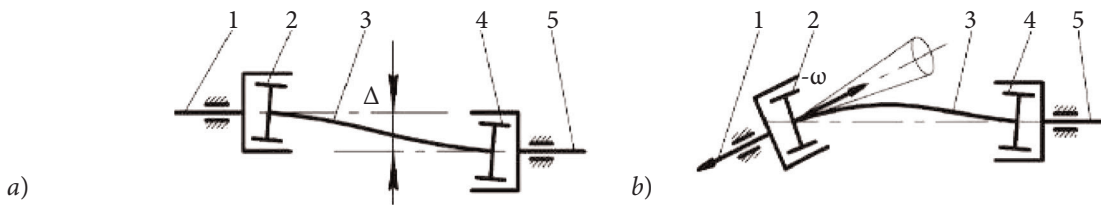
Beating (a) and misalignment (b) of the teeth of the gear clutch: 1 – propeller turbine; 2, 4 – toothed bushings; 3 – shaft; 5 – reducer
